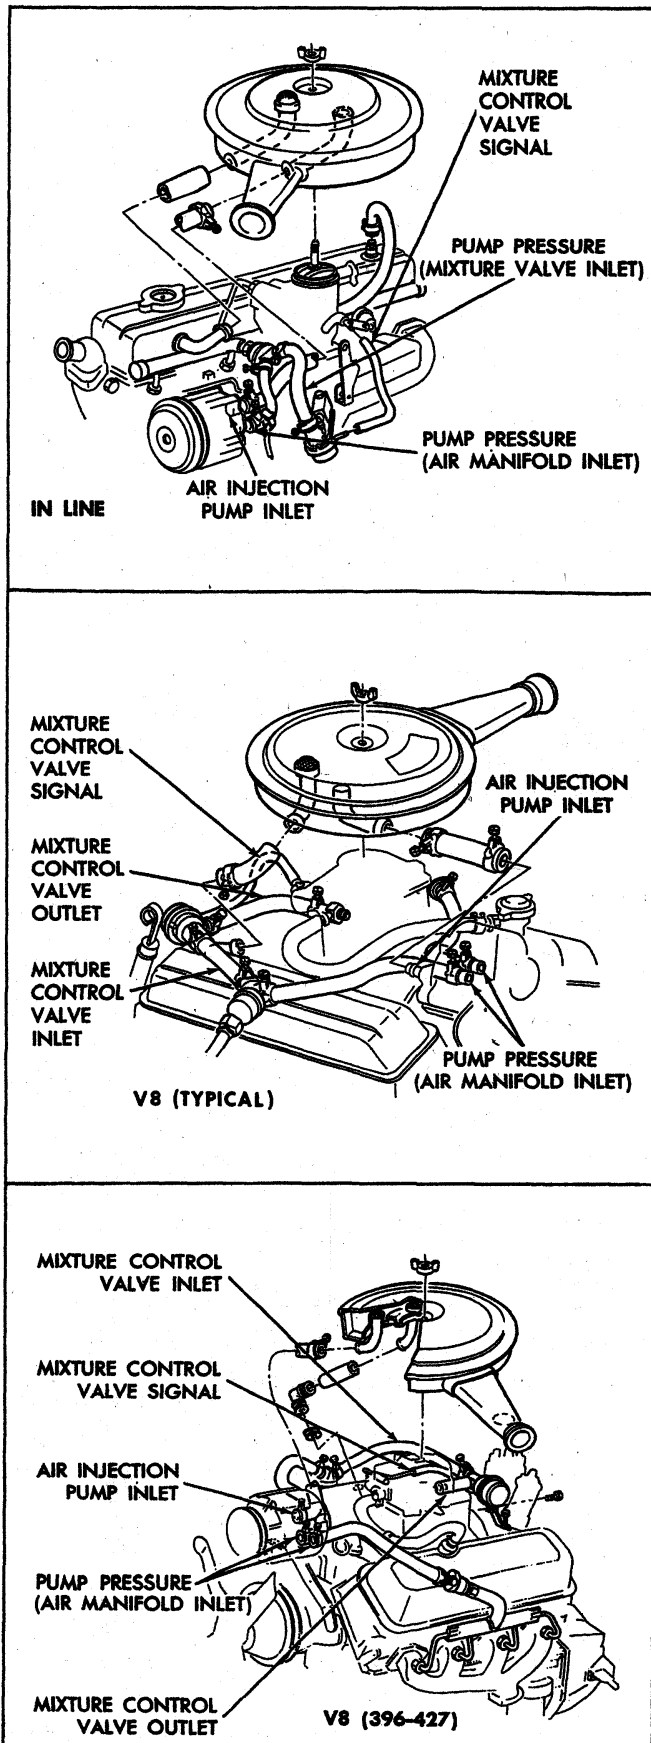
Air Manifold Hose and Tube Routing (Typical)
